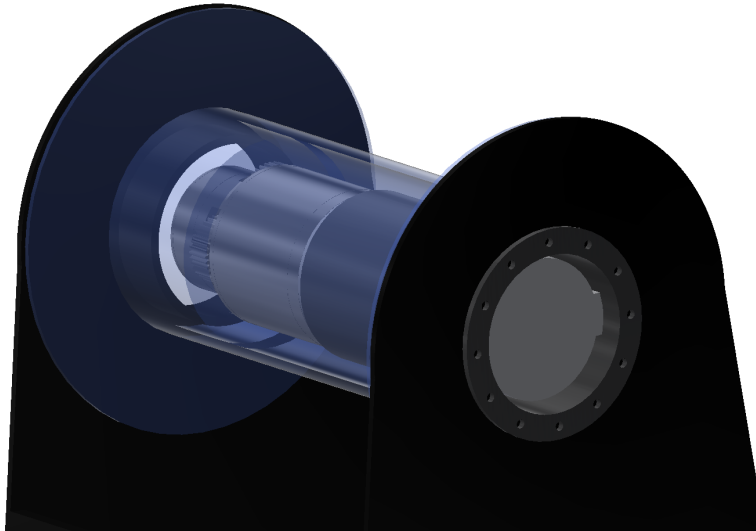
Example of the gearbox connected to a motor and mounted in a drum.
